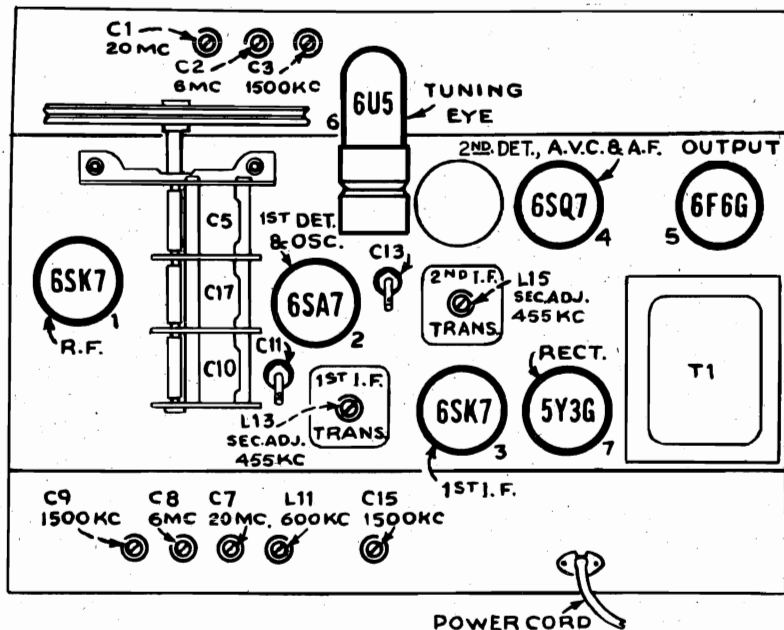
TUBE, TRIMMER AND PARTS LOCATION
